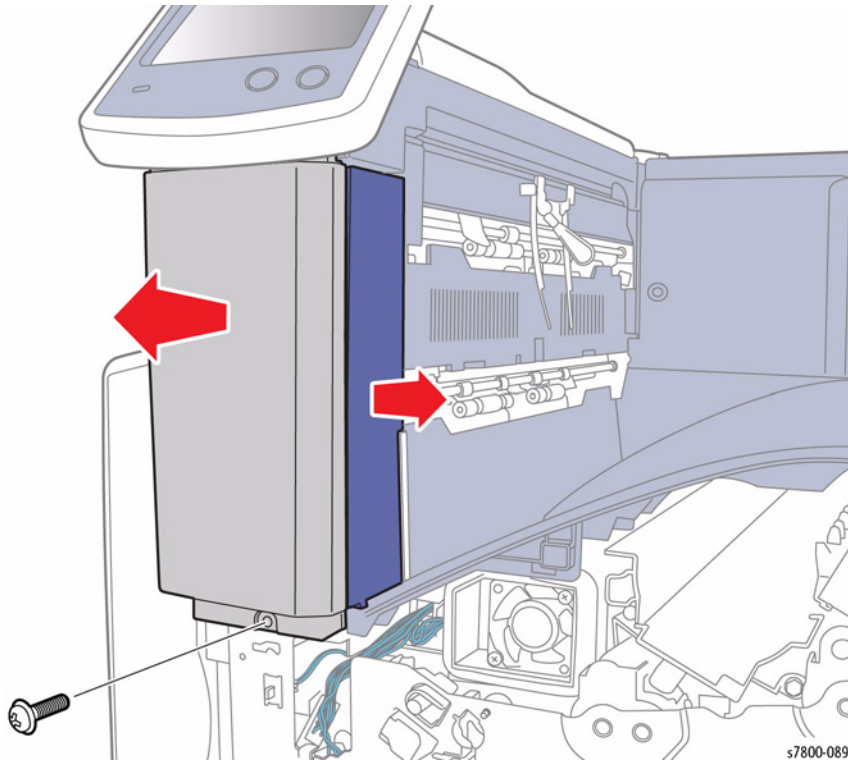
Removing the Front UI Bracket Base and Exit Front Cover
